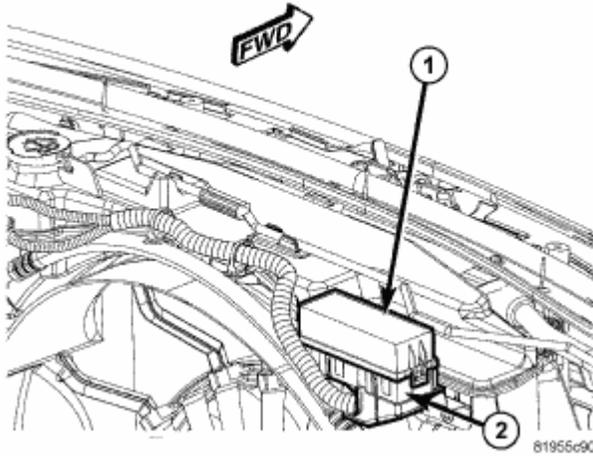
Cover & Diesel Accessory Fuse/Relay Block
